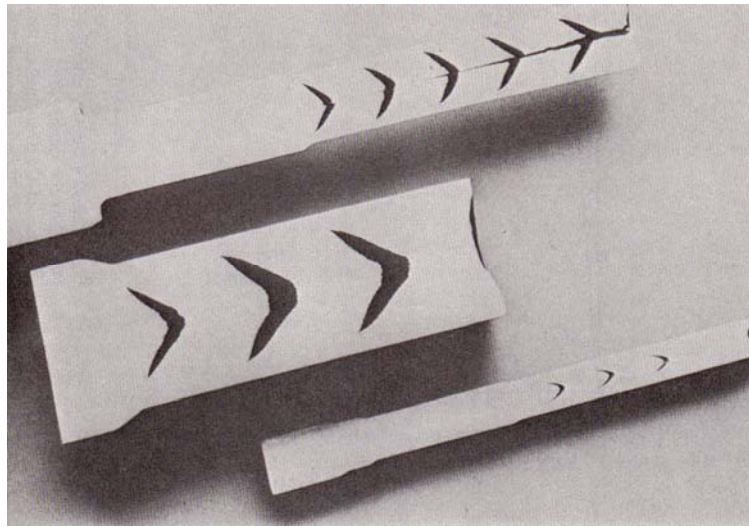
Center bursting in extruded steel rods Hosford et. al. [6]
